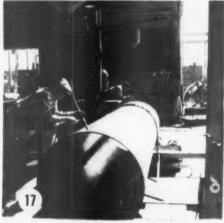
Closing welds for the steel cylinders are made by the submerged method on this machine. Fig. 17: Steel joint rings are welded to the steel cylinders by this method. Fig. 18: Steel cylinders are tested by internal hydrostatic pressure to check water-tightness of all welds while steel sheets are under a tensile stress of 24,000 p.s.i. Displacement tubes are used and the water is reused
